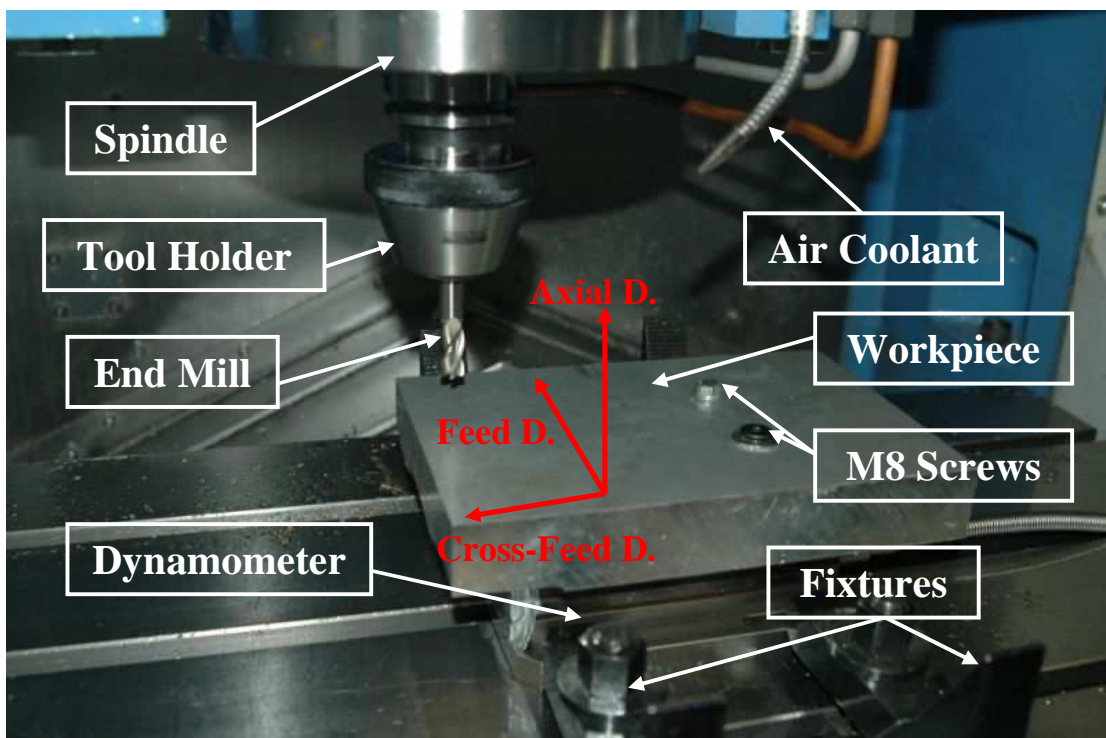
Workpiece and 3-component dynamometer fixed on top of each other to vertical machining center machine table for cutting tests.
